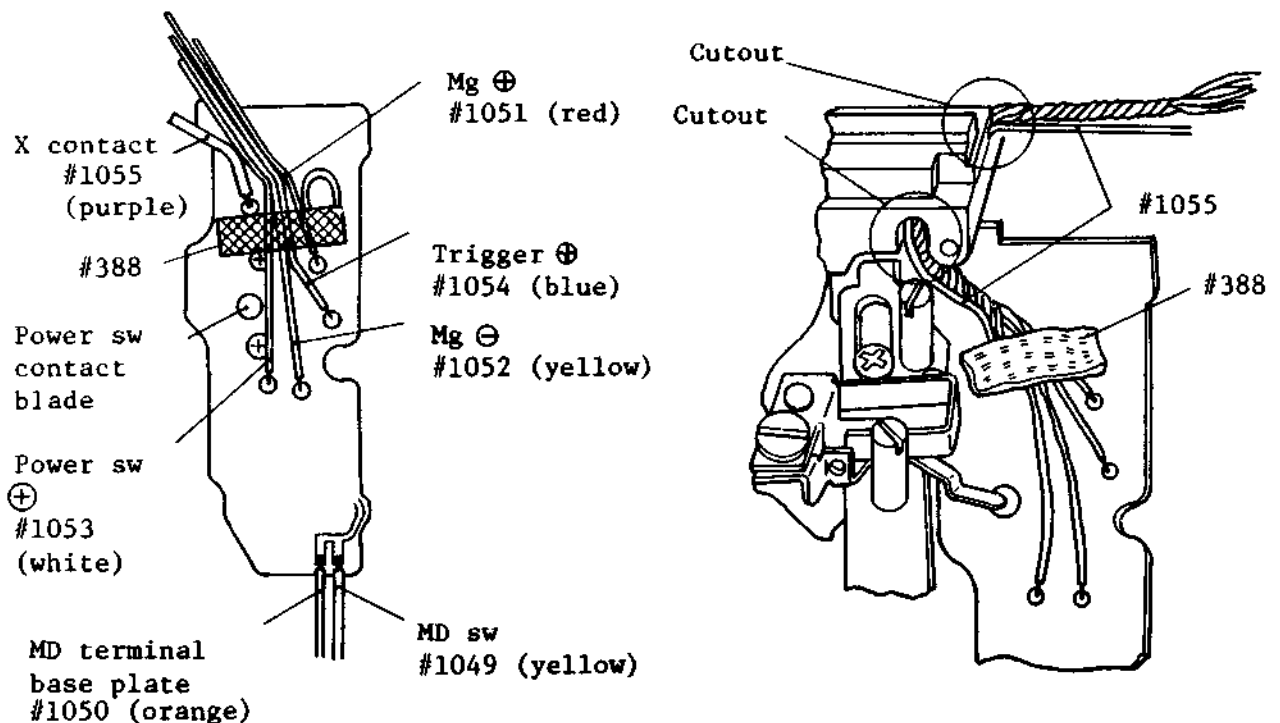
Soldering and route of shutter shutter base plate lead wires
